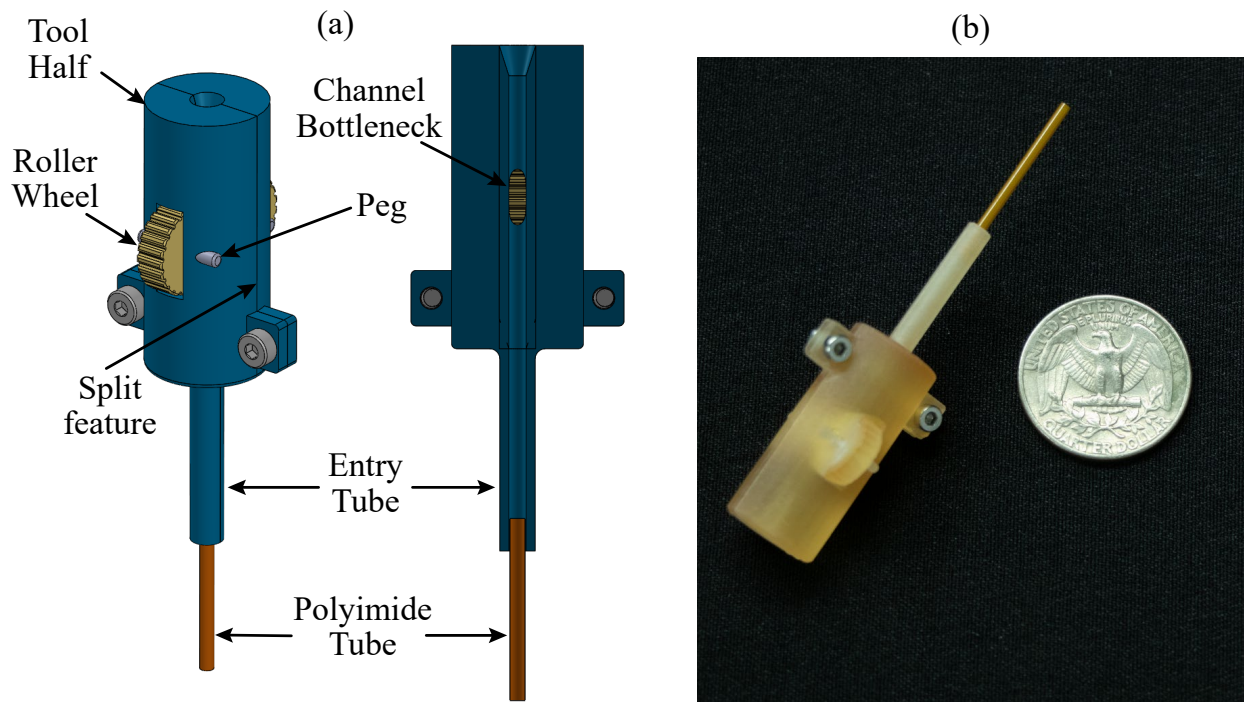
(a) Initial tool design and (b) Assembled device with autoclavable 3D printed pieces and United States quarter dollar for scale (diameter of 24.3 mm)
